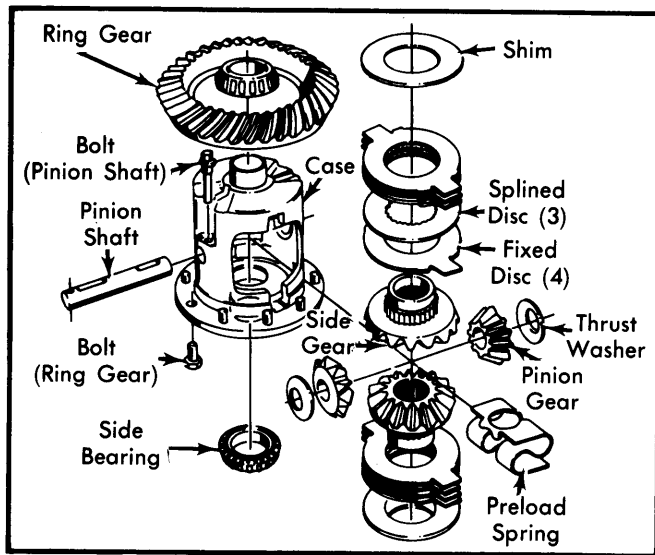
Exploded View of Positraction Unit ("S" Shaped Preload Spring)
